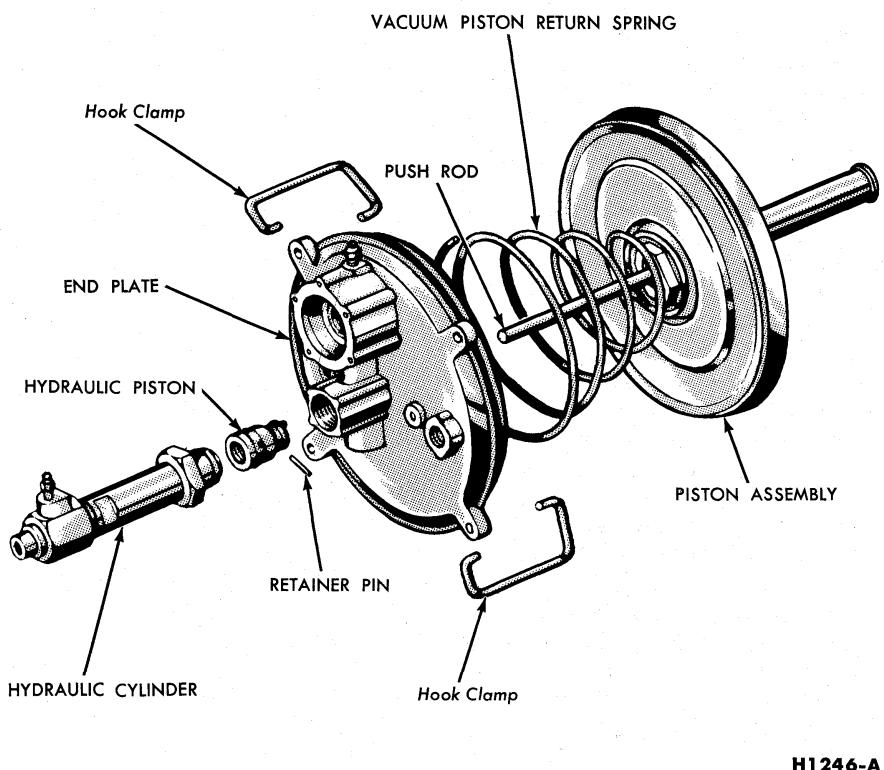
Vacuum Piston, End Plate, and Hydraulic Cylinder
